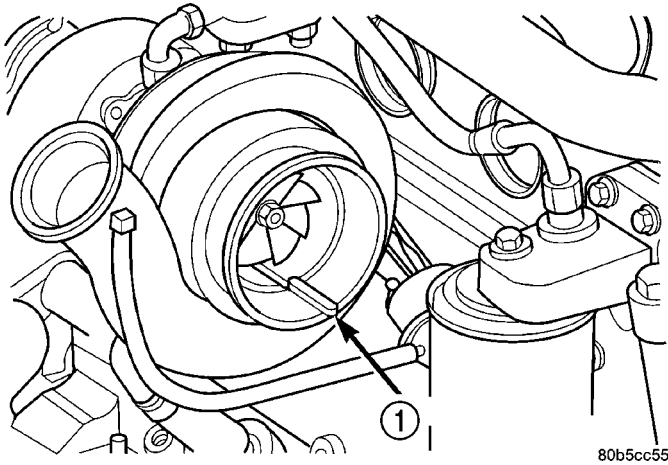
Measure Turbocharger Bearing Radial Clearance - Typical
